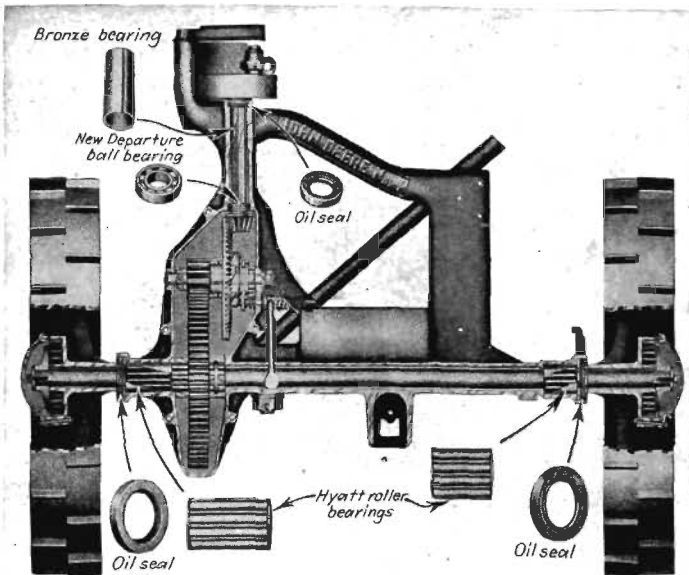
Mower frame showing enclosed gears and automatic lubrication of main operating parts. Note bearing and oil seals on axle line and pitman shaft.
